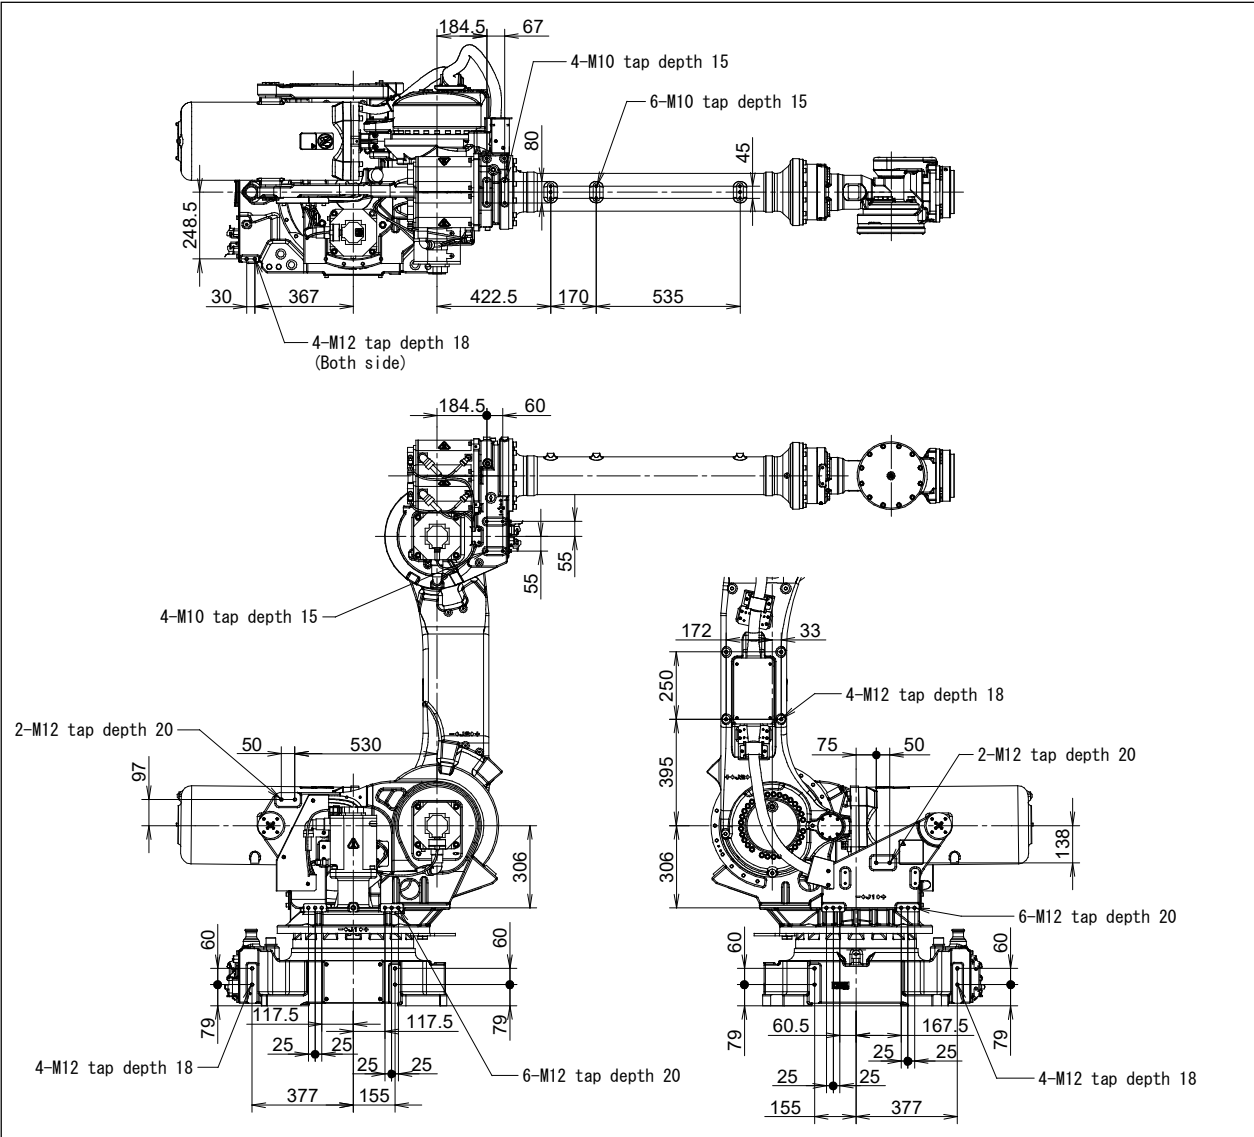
(b) Equipment mounting faces (R-2000iB/185L)
